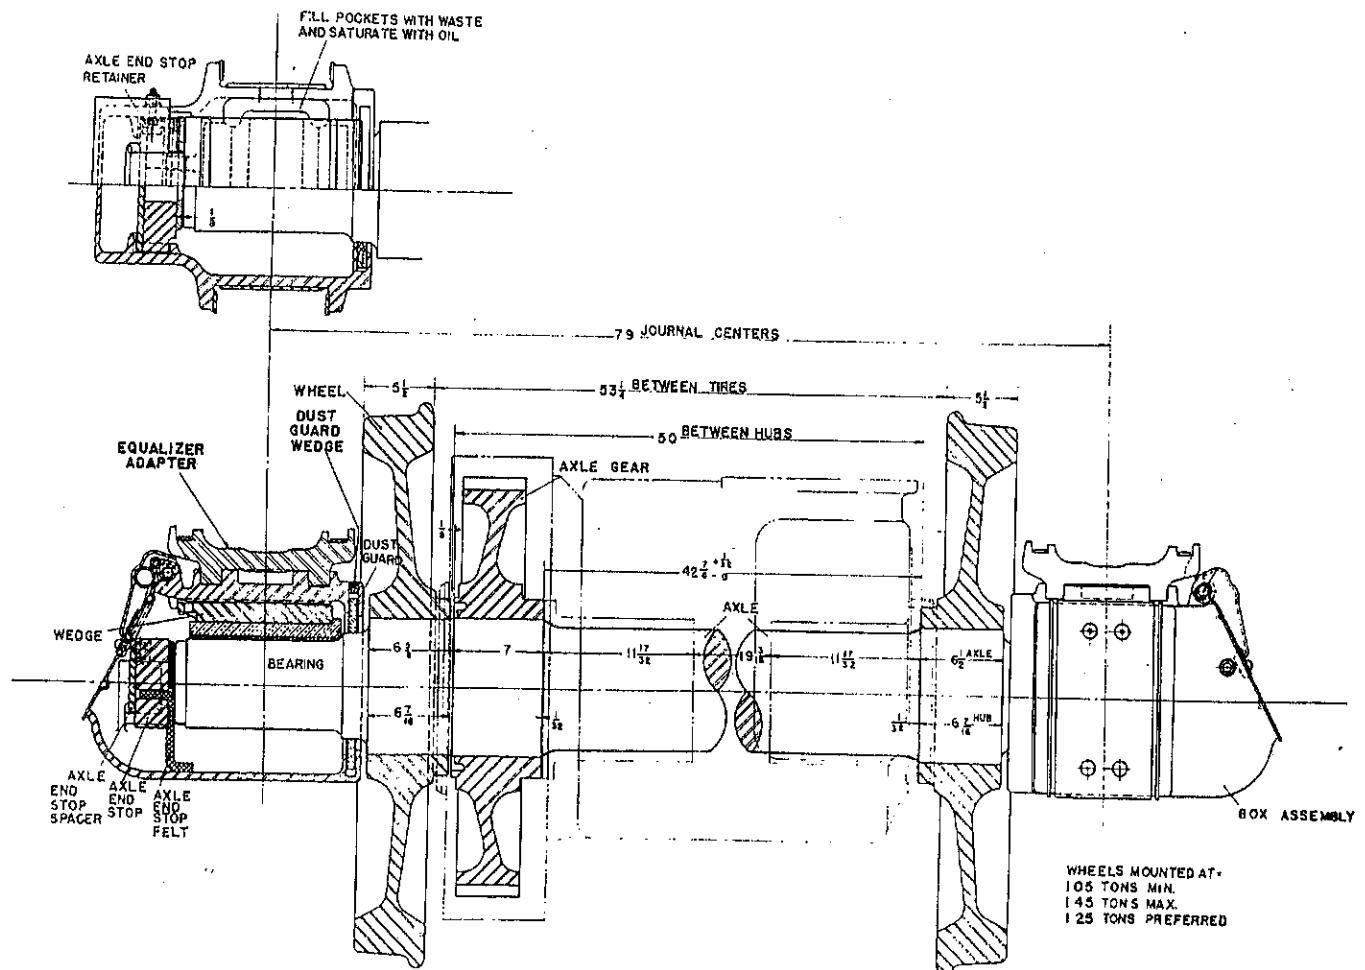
WHEEL, AXLE AND BOX ASSEMBLY WITH FRICTION BEARINGS
